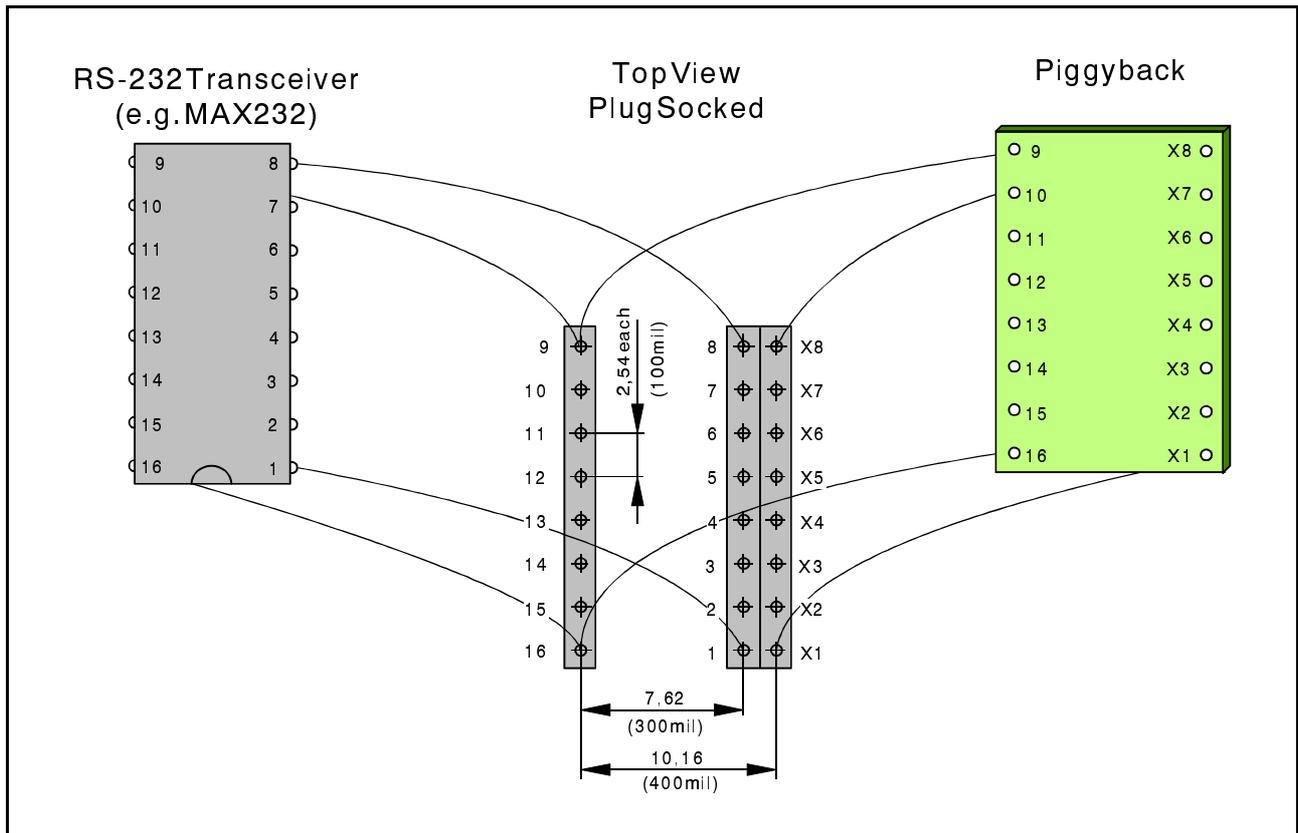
Plug-in socket dimensions and piggyback/RS-232 driver arrangement
